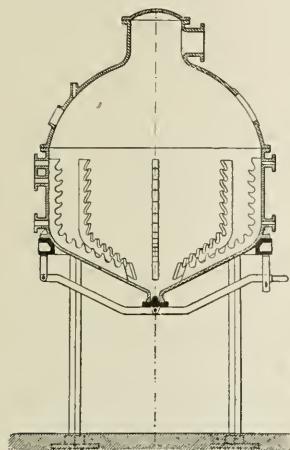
EVAPORATOR MADE OF THREE PARTS.
